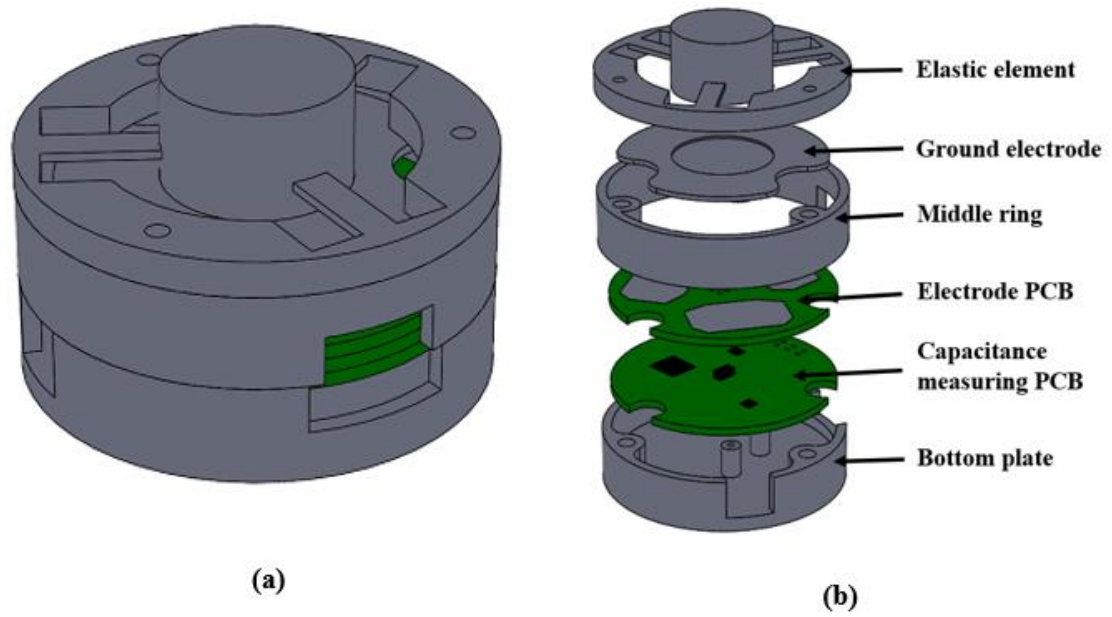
The full sensor (a) after assembling all the parts, and (b) its exploded view.
